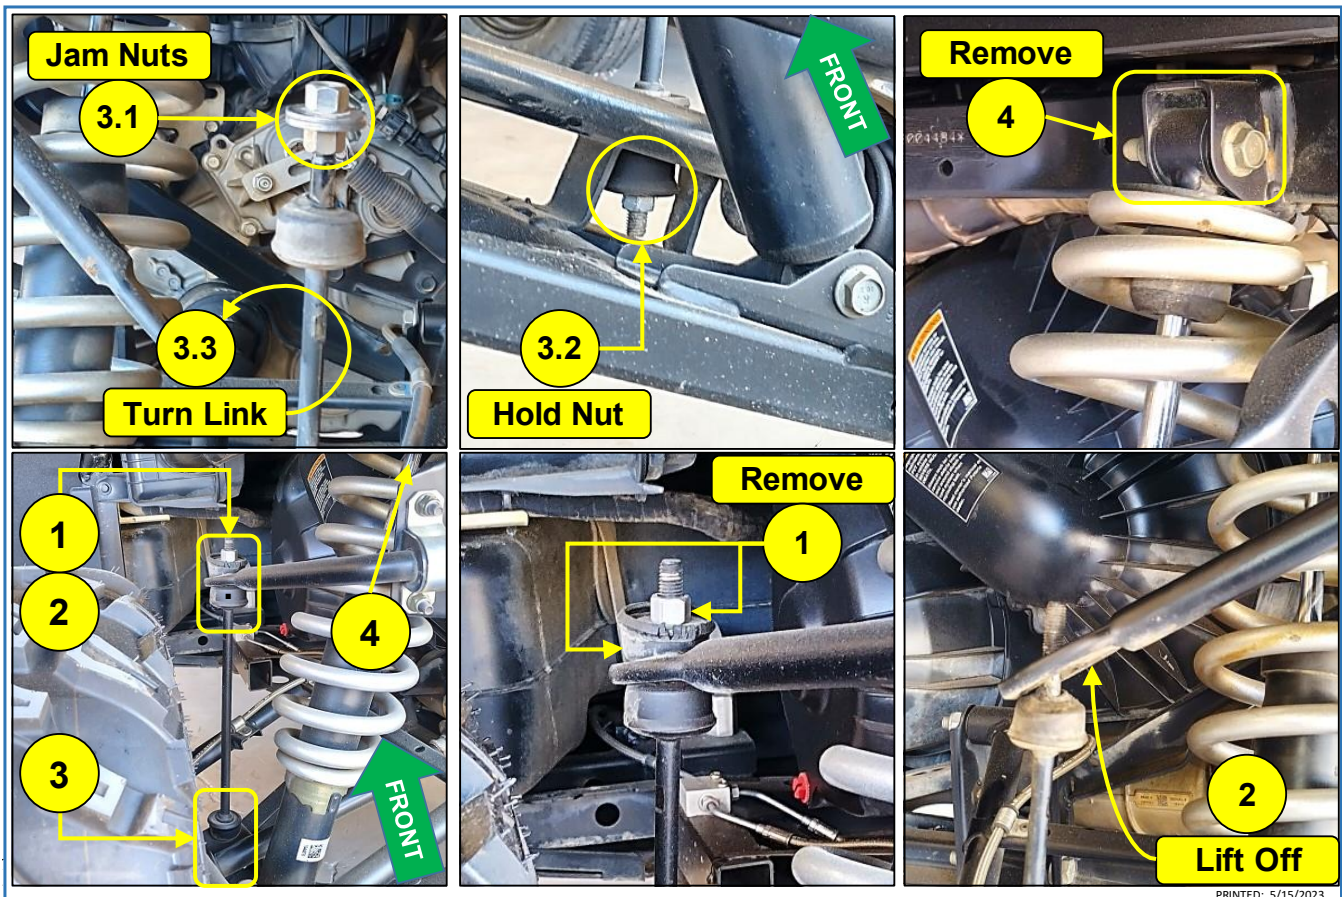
TIP.13 Disassembling Rear Sway Bar Links and Shock Bolts
